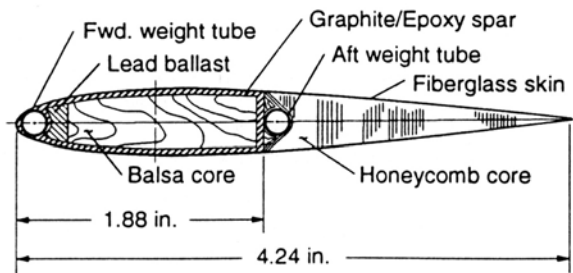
Cross section of extension-twist-coupled model rotor blade used in hover test.
